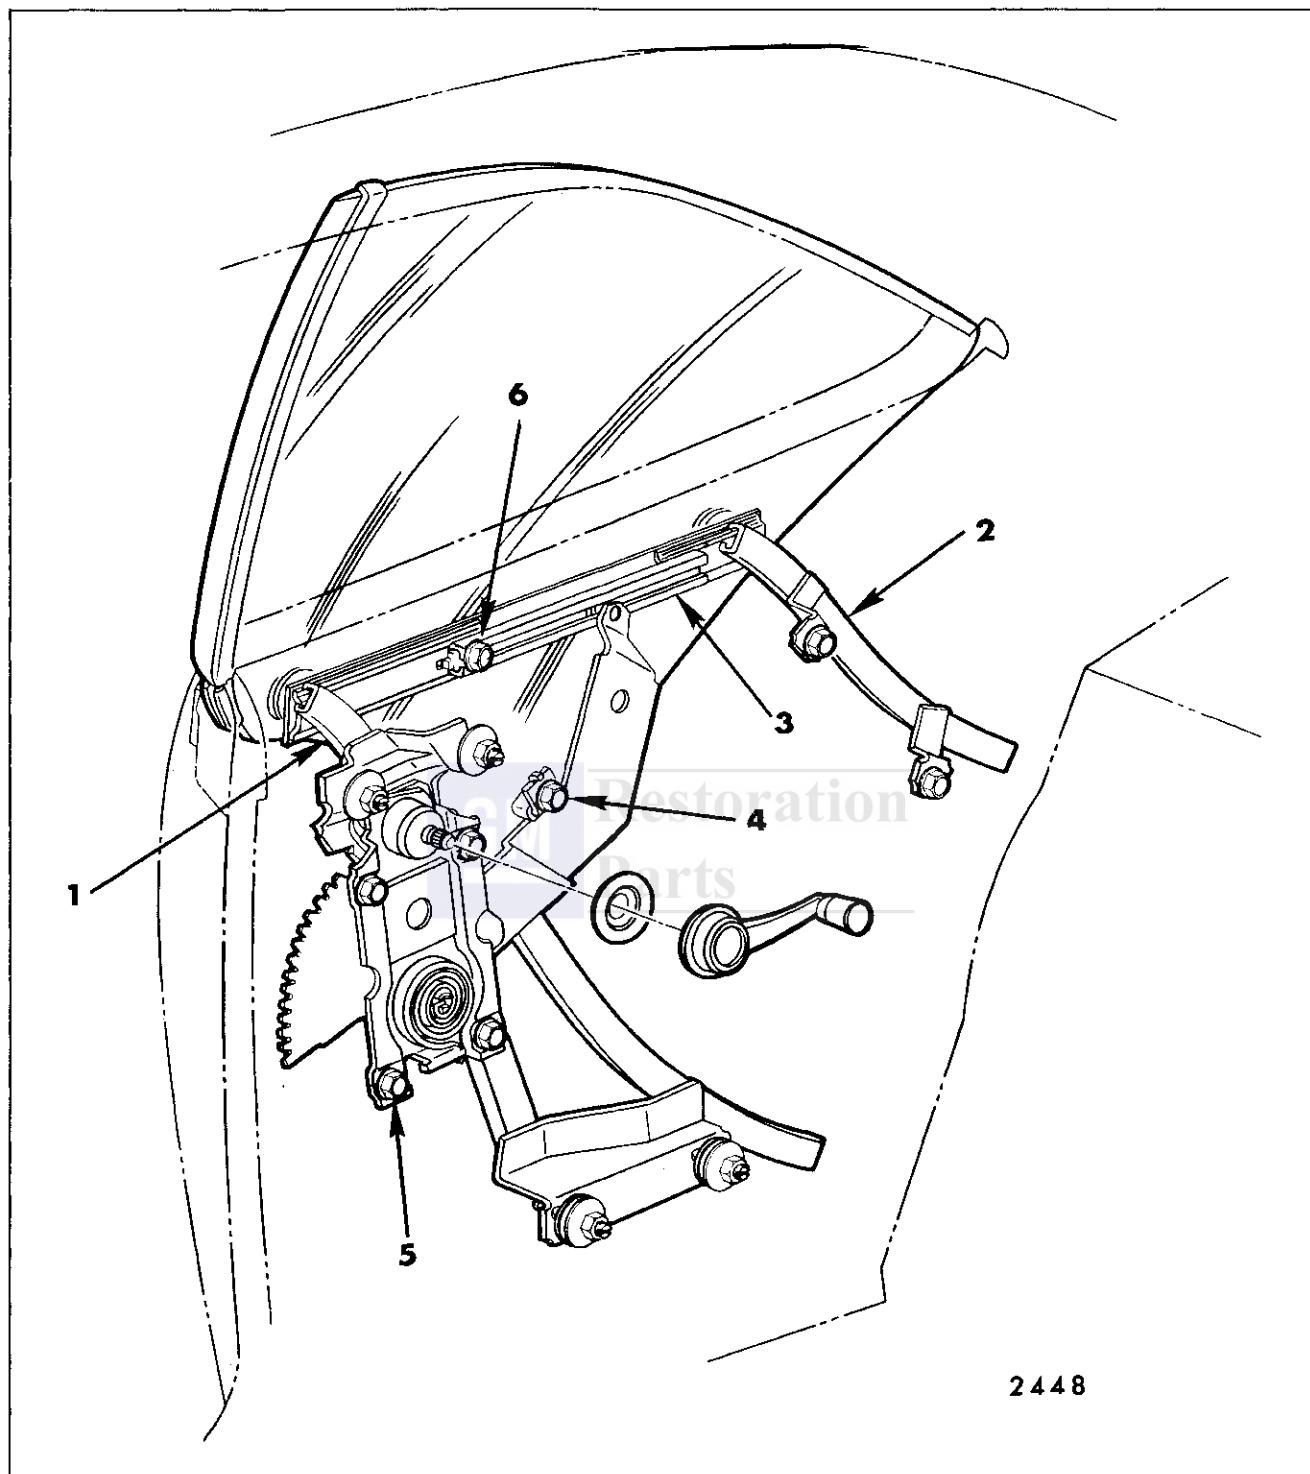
Rear Quarter Hardware - "Z-37" Styles
